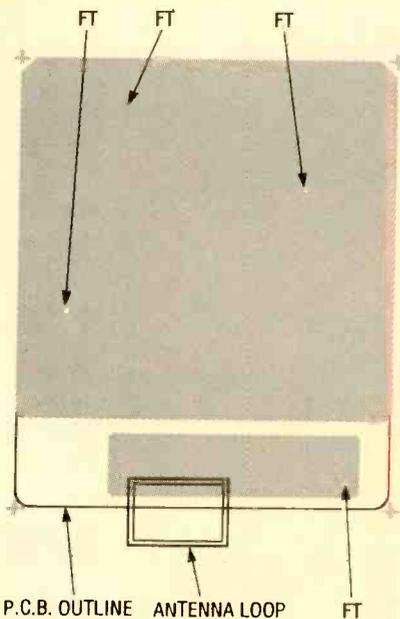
Once the board has been etched, drill four holes in the board at the points indicated in this diagram, using a #76 drill bit. Note that those four holes are the only board drilling that's required. Once drilled insert #30-gauge wire through the holes and solder the ends of the wires to the pads on both sides of the board.
